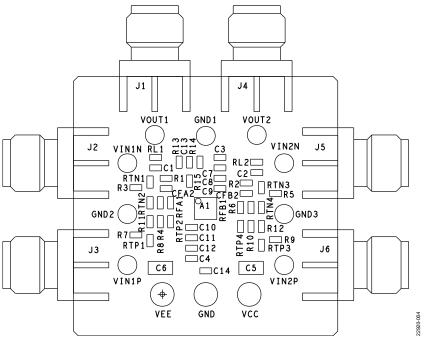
EVAL-LTC6229MS8E Assembly Drawing, Primary Side
